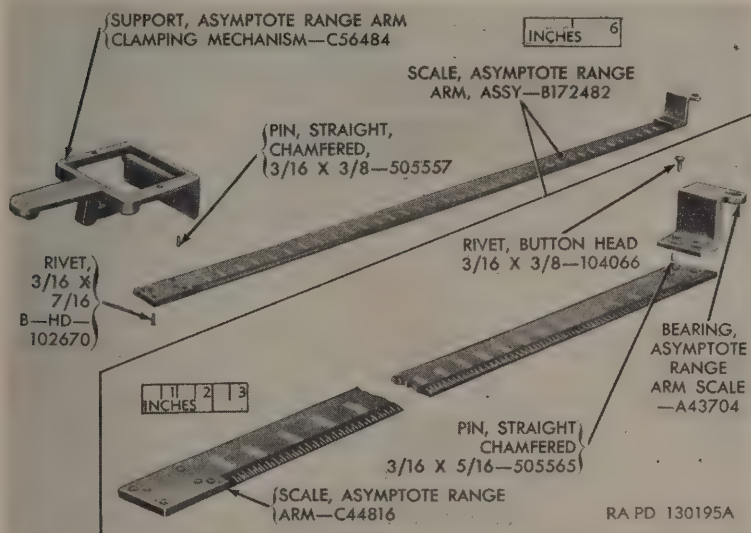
Asymptote range arm (without clamping mechanism) disassembled—sound-ranging plotting board M1 or M1A1 (M1 shown).
